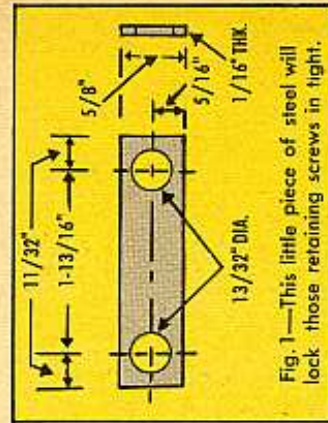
This little piece of steel will lock those retaining screws in tight.
